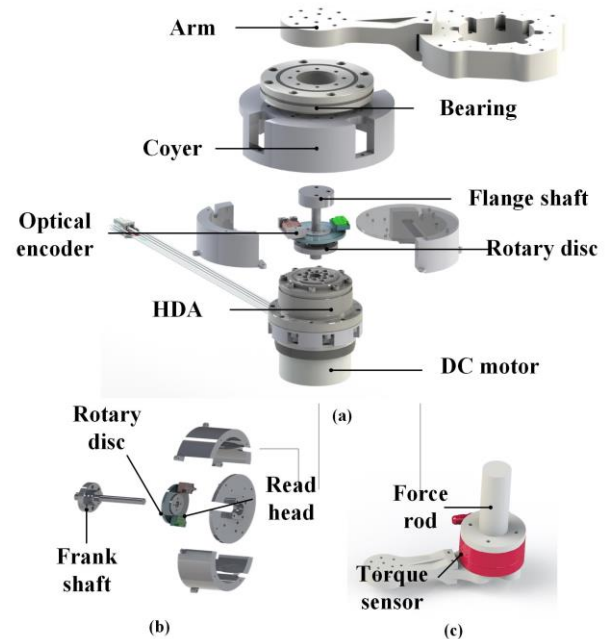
Schematics of the dual-joint HDA system. (a) Explosive figure of HDA arm. (b) Exploded view of the displacement and torque sensors. (c) Torque sensor module.
